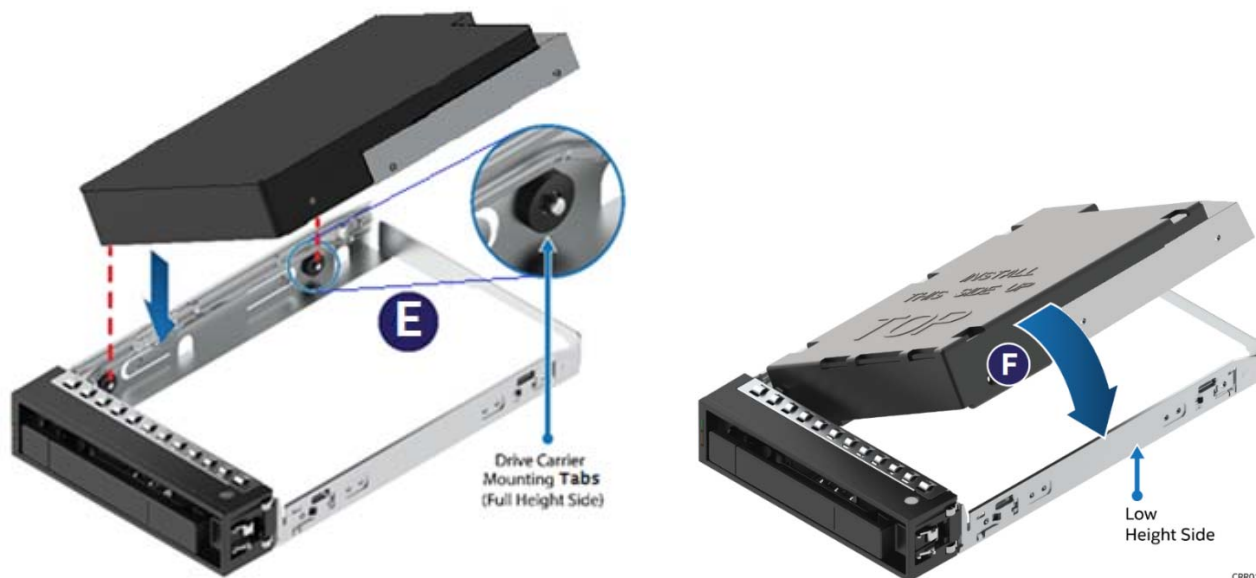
3.5" Drive Carrier to 2.5" SSD Bracket – Mount Bracket Assembly to Carrier
